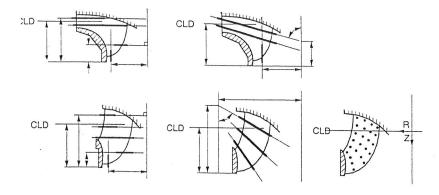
Example of the dimensions to be checked on the runner/impeller of a radial flow machine
